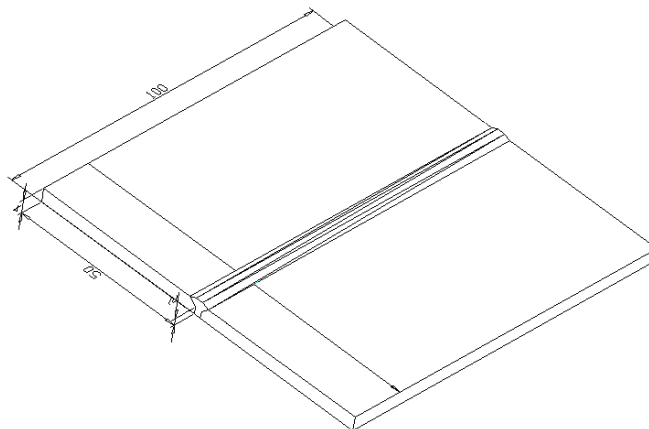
TIG welding joint (dimensions in mm)
